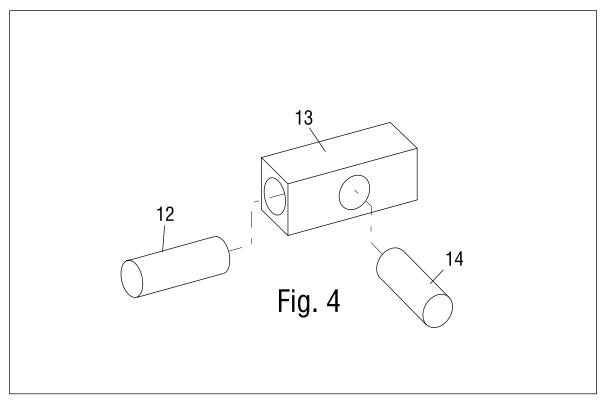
Exploded View With Zigzagged Projection Lines
